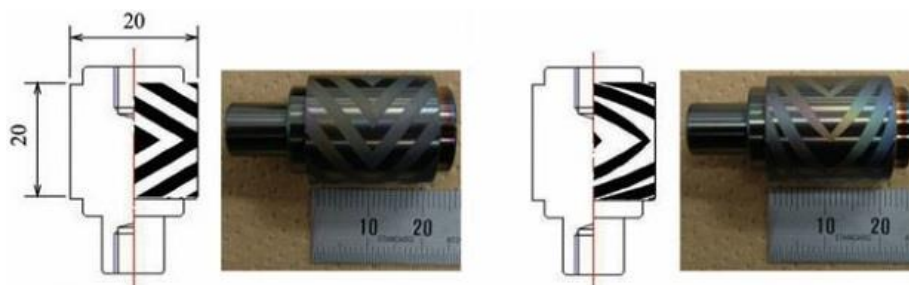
Hydrodynamic air bearing with herringbone grooves a) uniform distributed groove pattern, and b) non-uniform distributed groove pattern [39]
